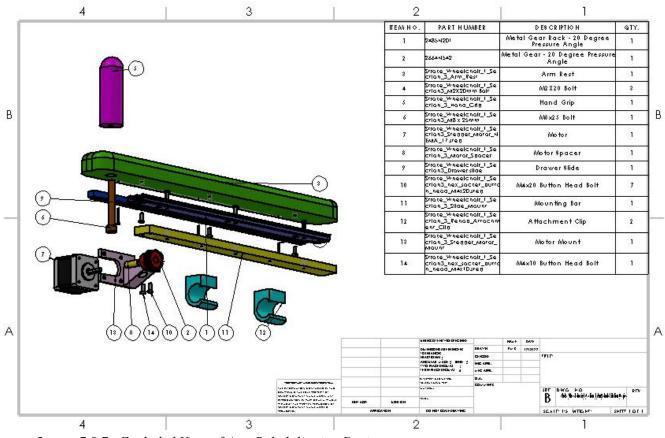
Exploded View of Arm Rehabilitation Device
